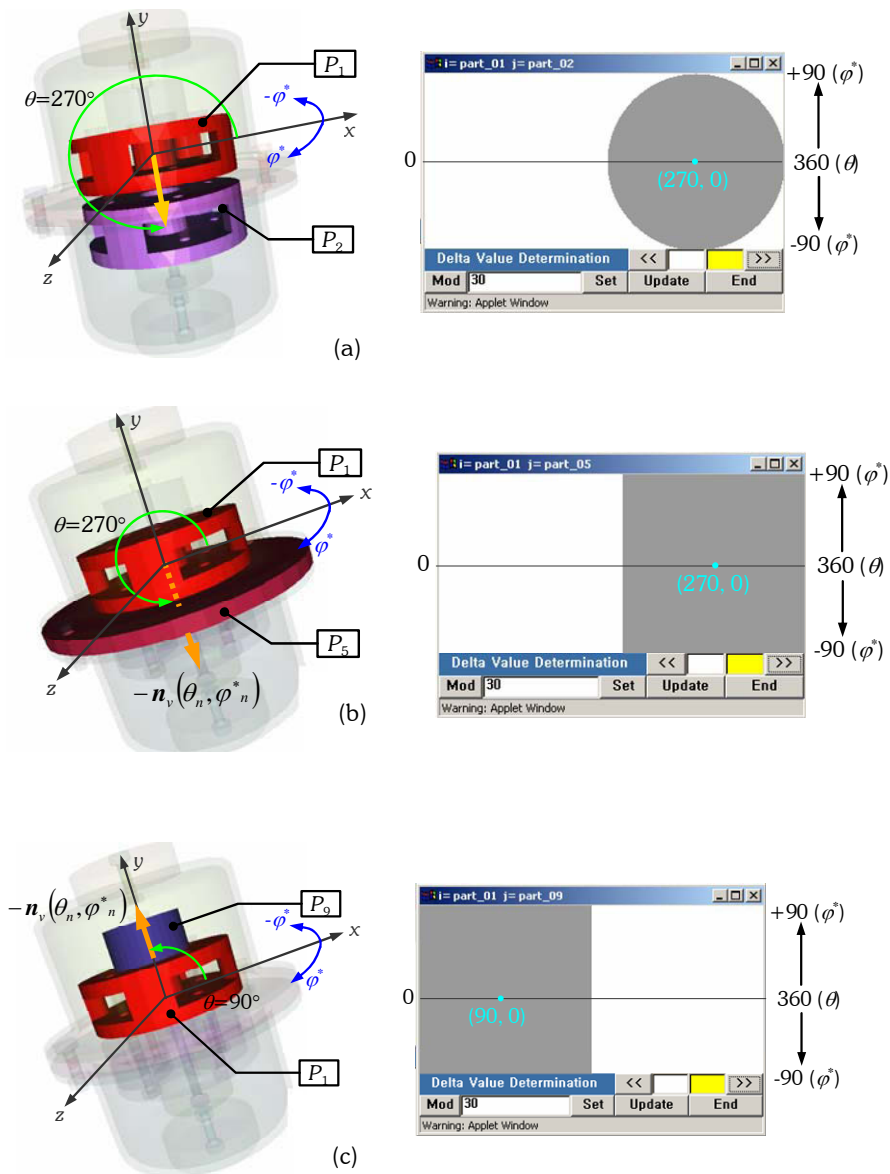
Test results of parts accessibility (a) Parts 1 & 2, (b) Parts 1 & 5 and (c) Parts 1 & 9.
